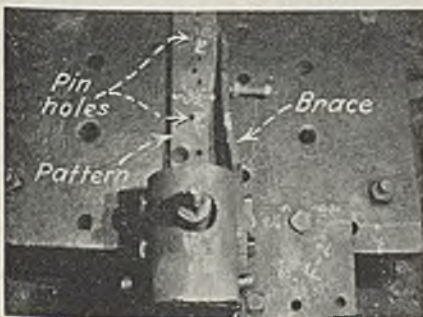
Looking down on the bender with the pattern shown in Fig. 13 in place. The pinholes are used for positioning the irons for bending.
